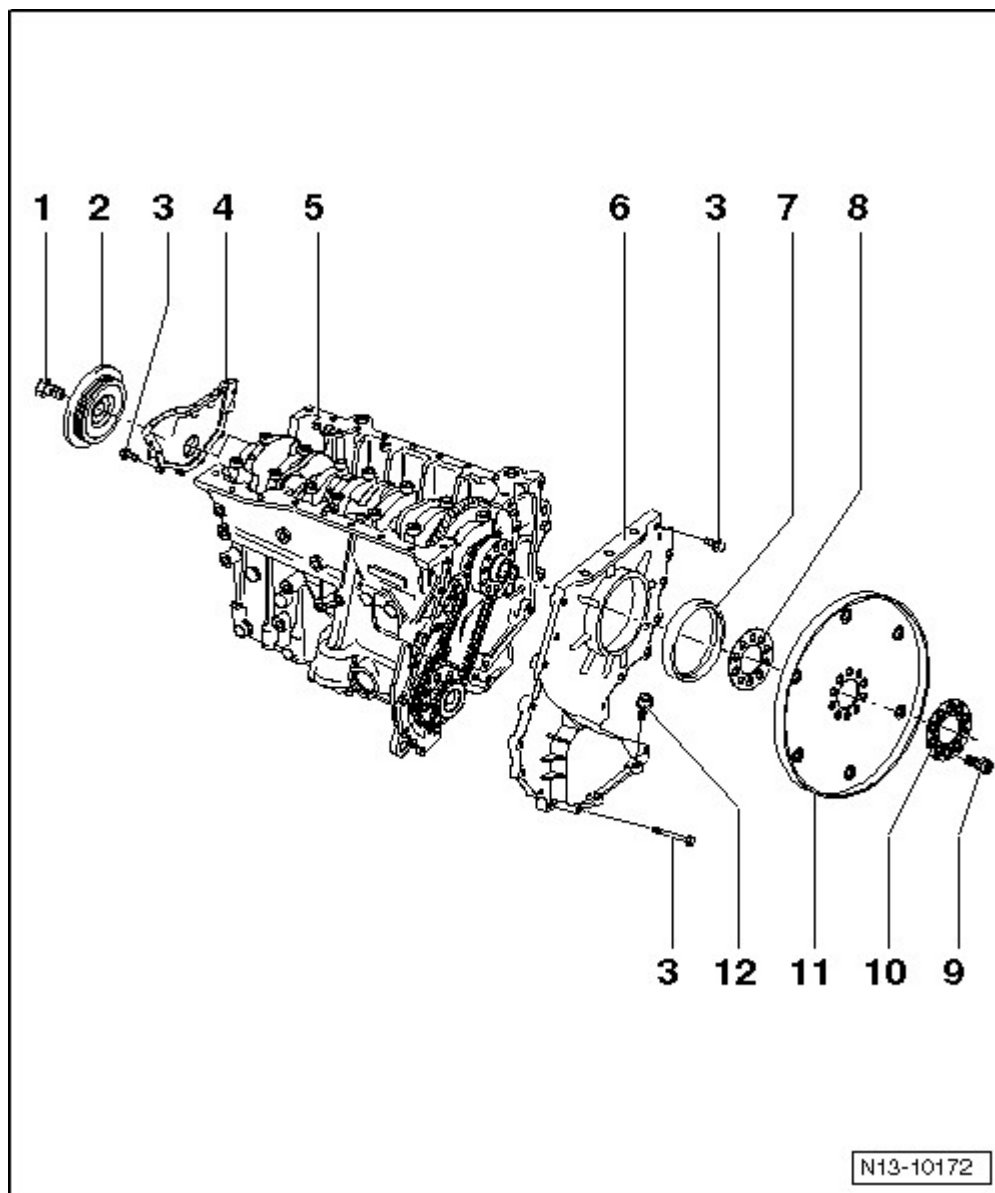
Identifying Sealing Flange And Drive Plate, Assembly Overview
